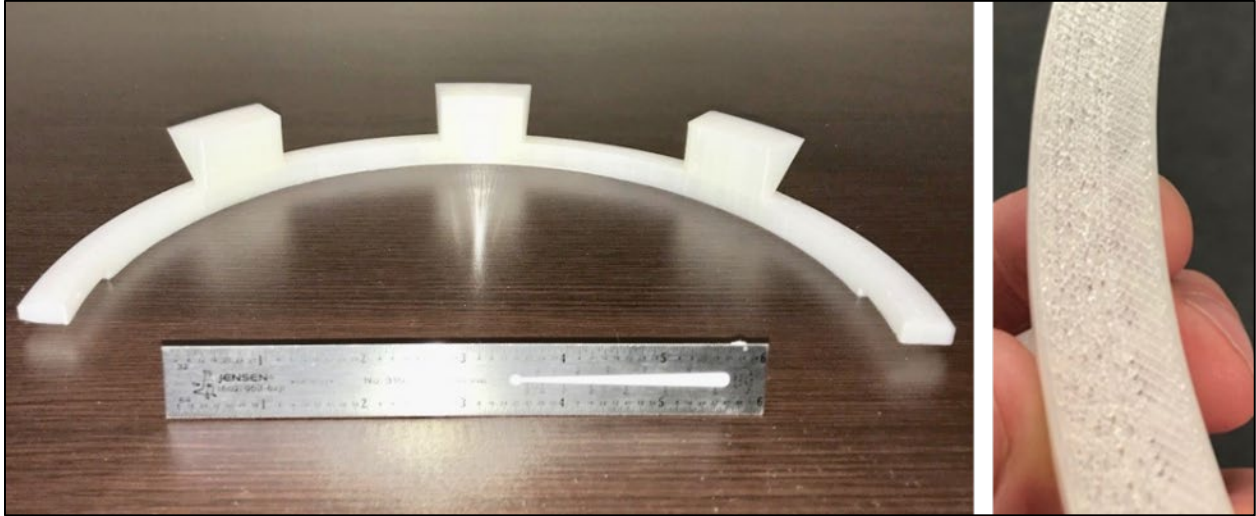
Left: Printed PLA ring half pattern with gating system. Right: Small voids in the printed PLA ring surface due to incorrect print settings.
